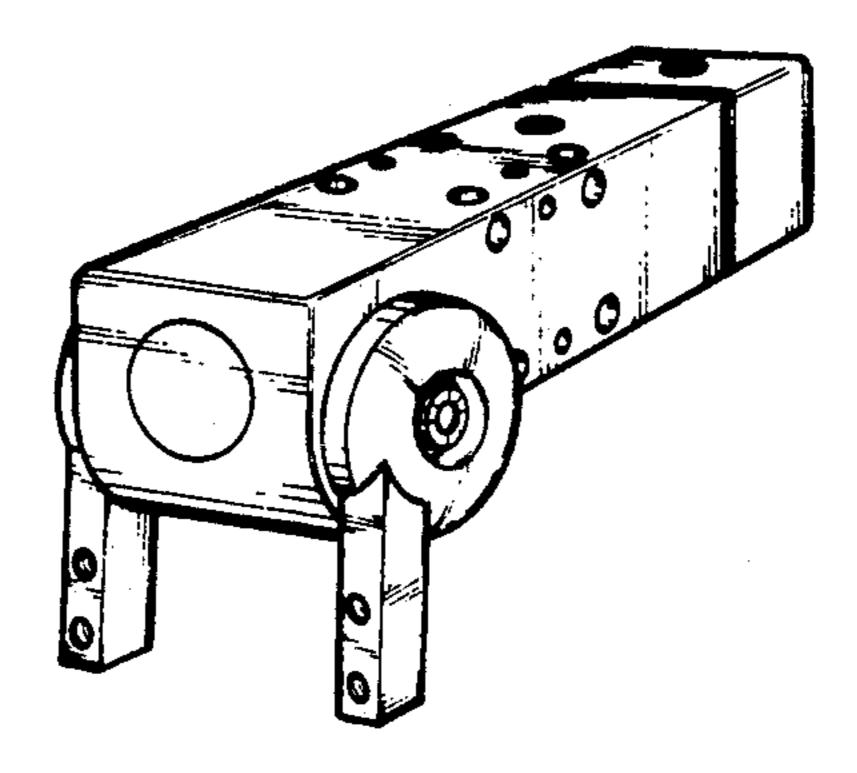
is a bottom plan view of the clamp of FIG. 1; FIG. 8 is a perspective view similar to FIG. 1 showing a different species of clamping arm design;
